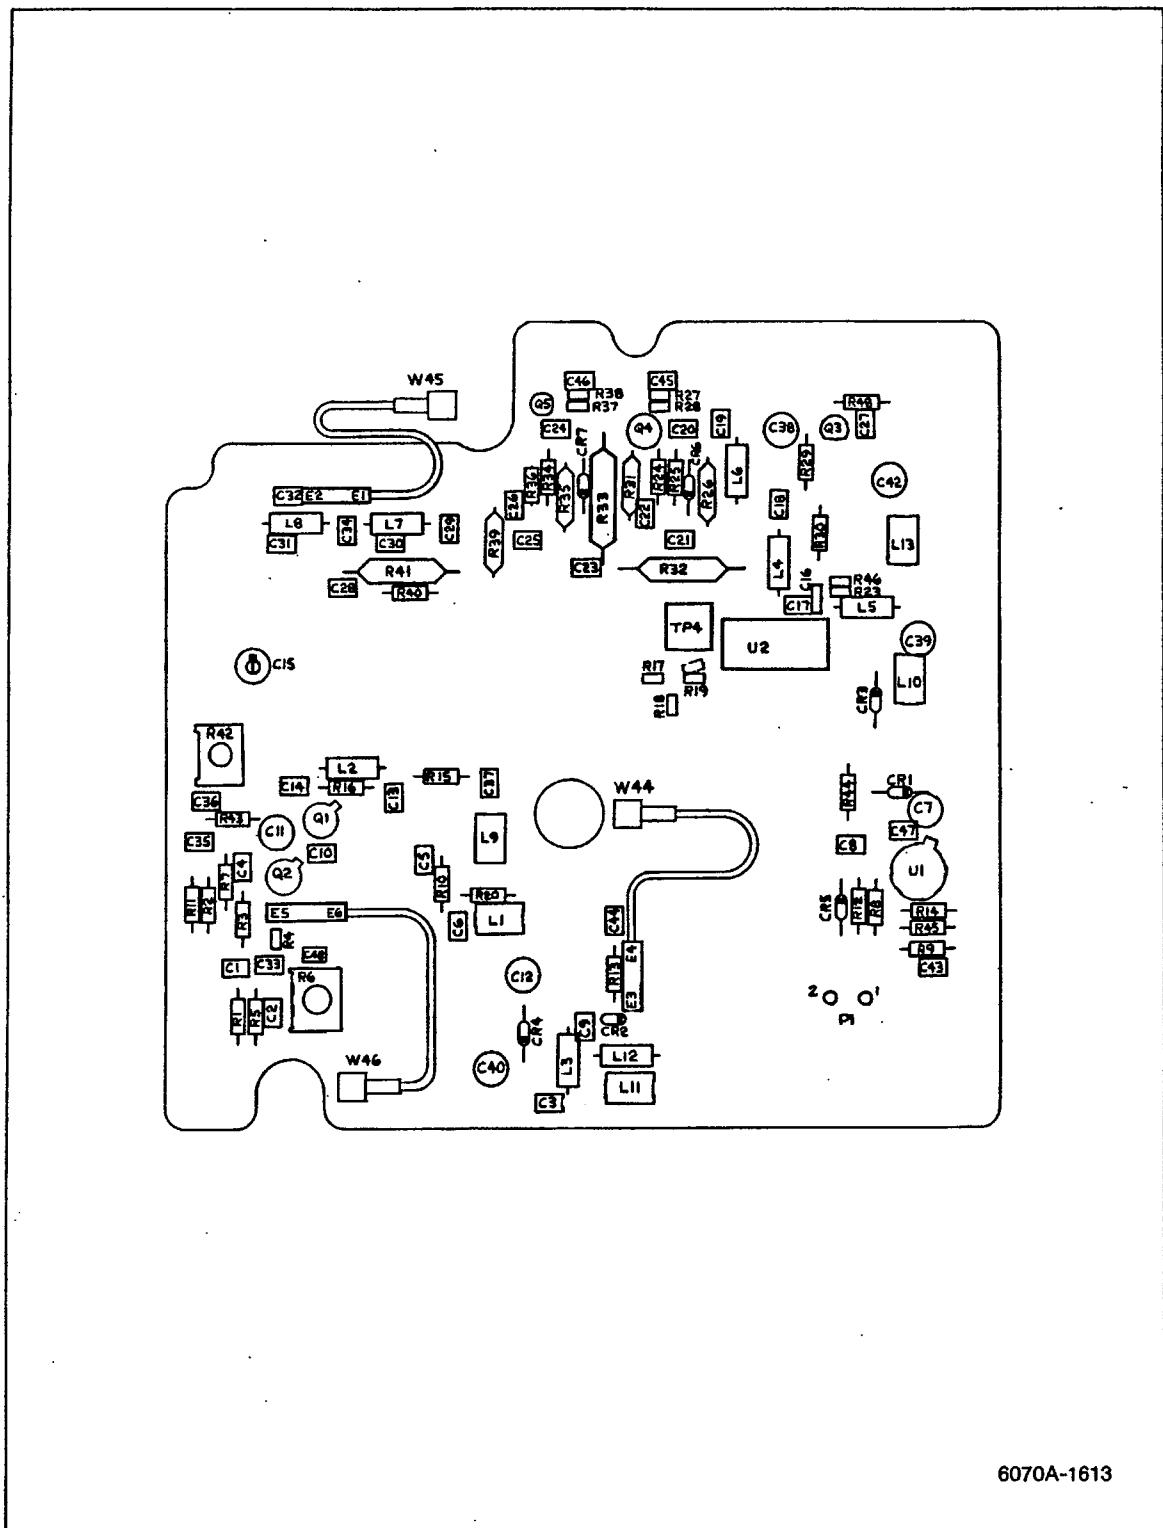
A4A9 Heterodyne Converter PCB Assembly
